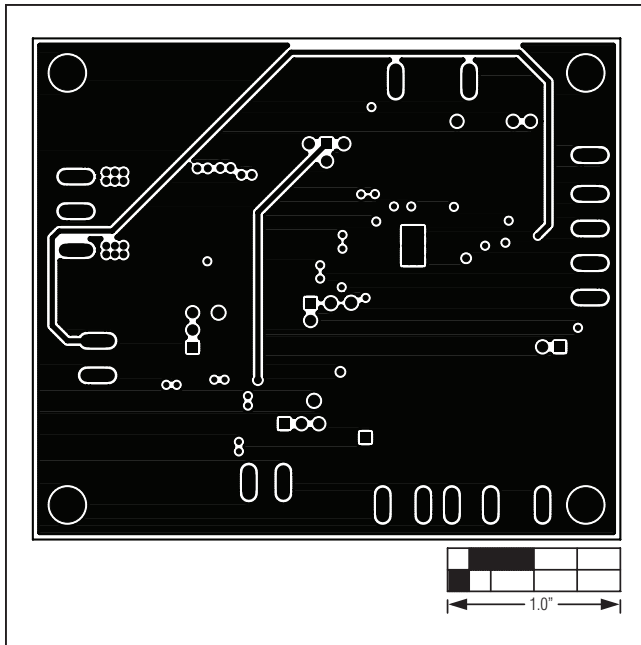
MAX16929 EV Kit PCB Layout—Layer 3
